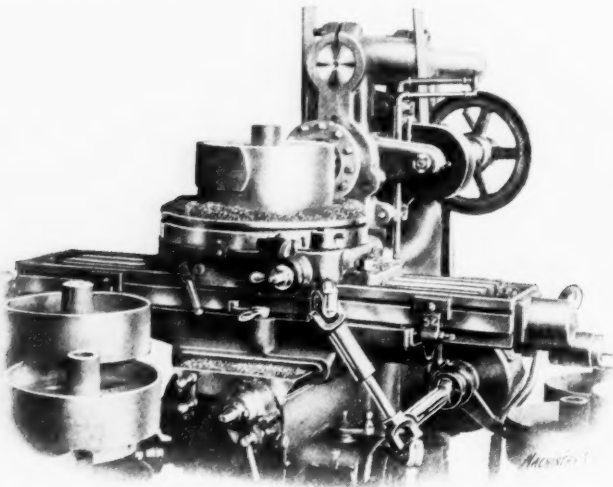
Kempsmith Horizontal Circular Milling and Indexing Attachment being used for Pulley Crowning.
